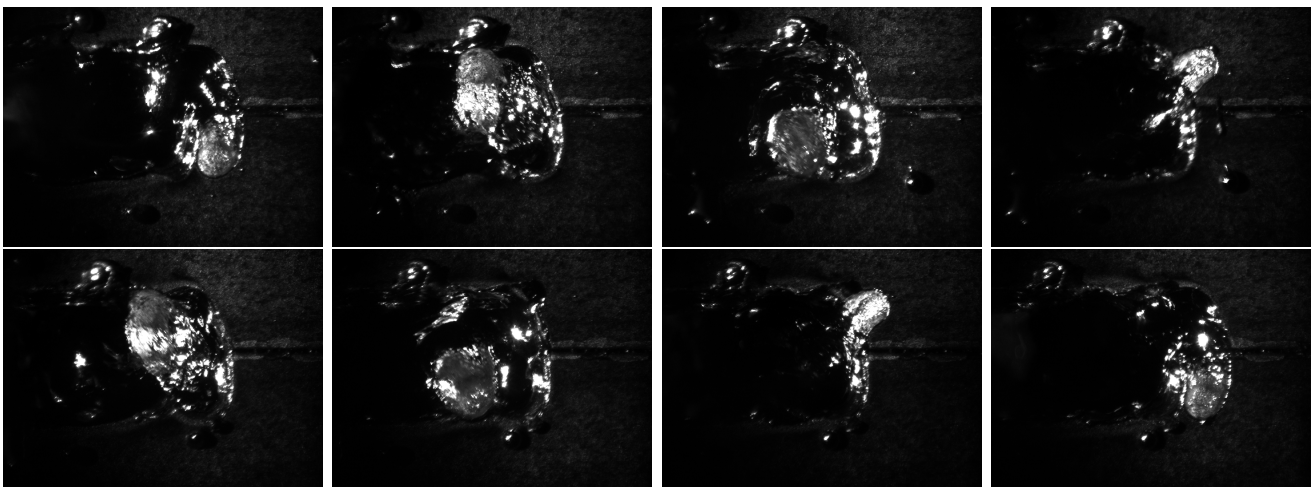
Eight consecutive images of welding without a clear keyhole. (Index 102)
